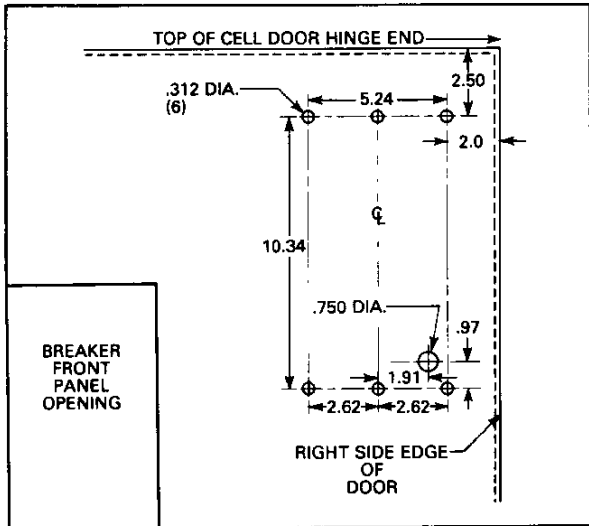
Amptector Mounting Details Vertical Mount AK-2A-50/75/100 Front View of Cell Door
